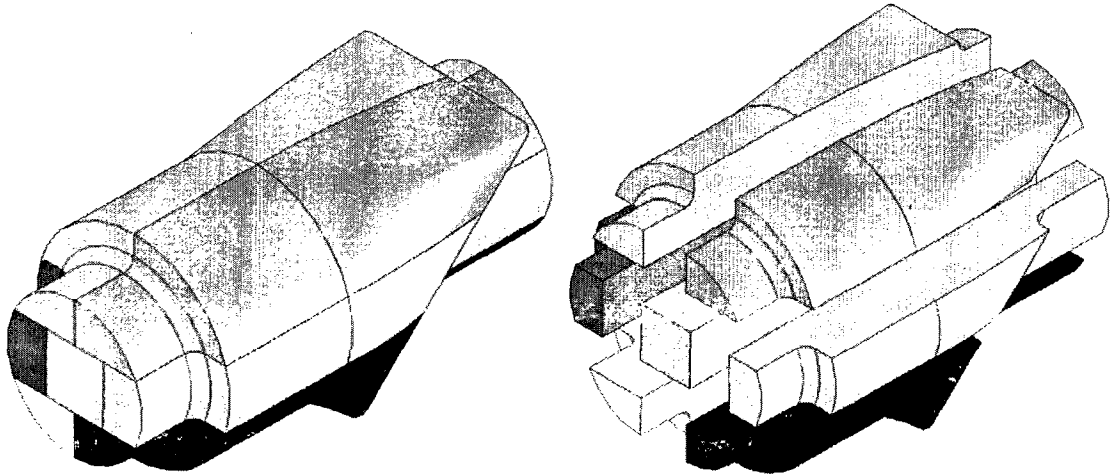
SolidWorks Model of Mandrel: Assembled (Left) and Exploded View
